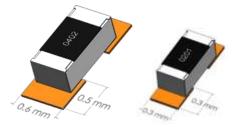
Typical geometries of solder pads for small SMD components; right 0402 and left 0201 form factor
